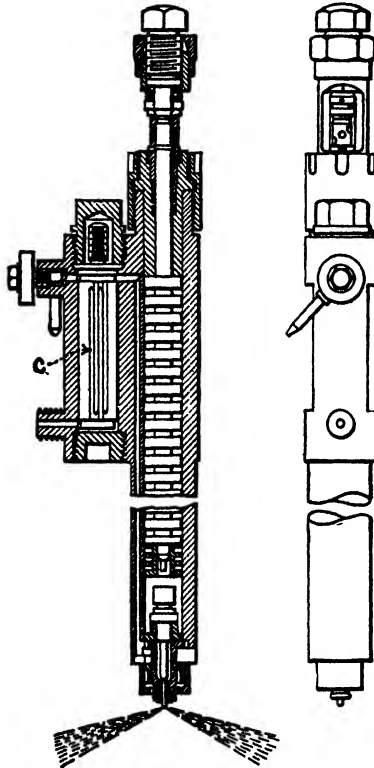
Spray valve of the Hesselmann system, including an oil filter *c*.
